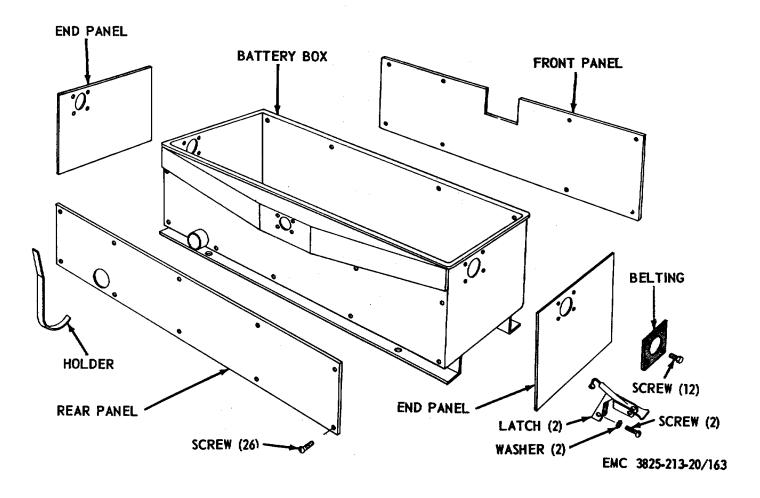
Battery box assembly, disassembly and reassembly, exploded view.
